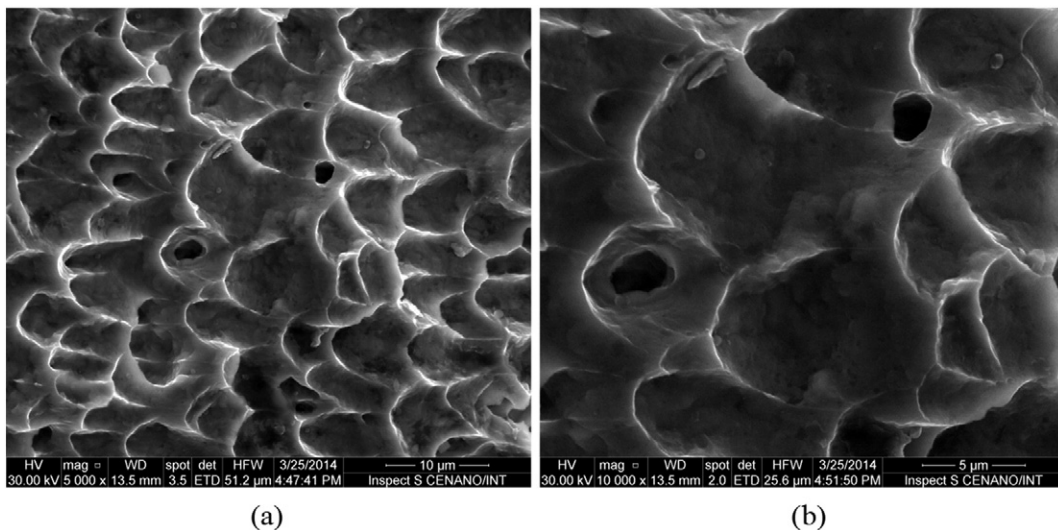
Fractograph of un-aged weld metal after Charpy impact test.
